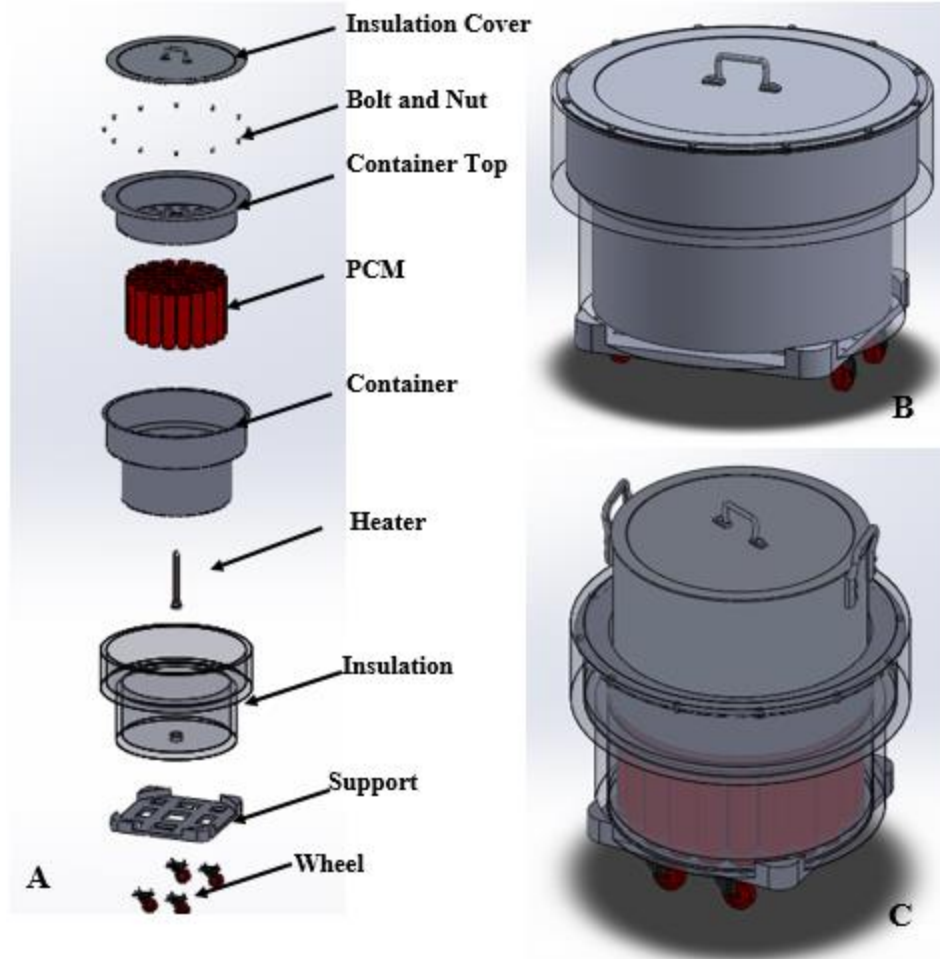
(A) Exploded view (B) charging condition assembly (C) discharging assembly
